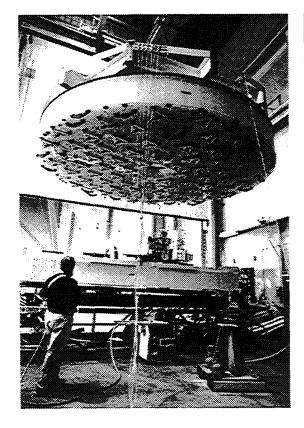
Transfering the MMT 6.5 with the Vacuum Lifting Fixture onto the base of the transportation box for inspection
